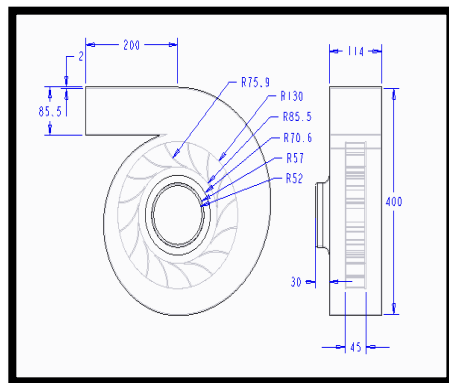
Drafting of assembly – centrifugal fan for 16 blades
